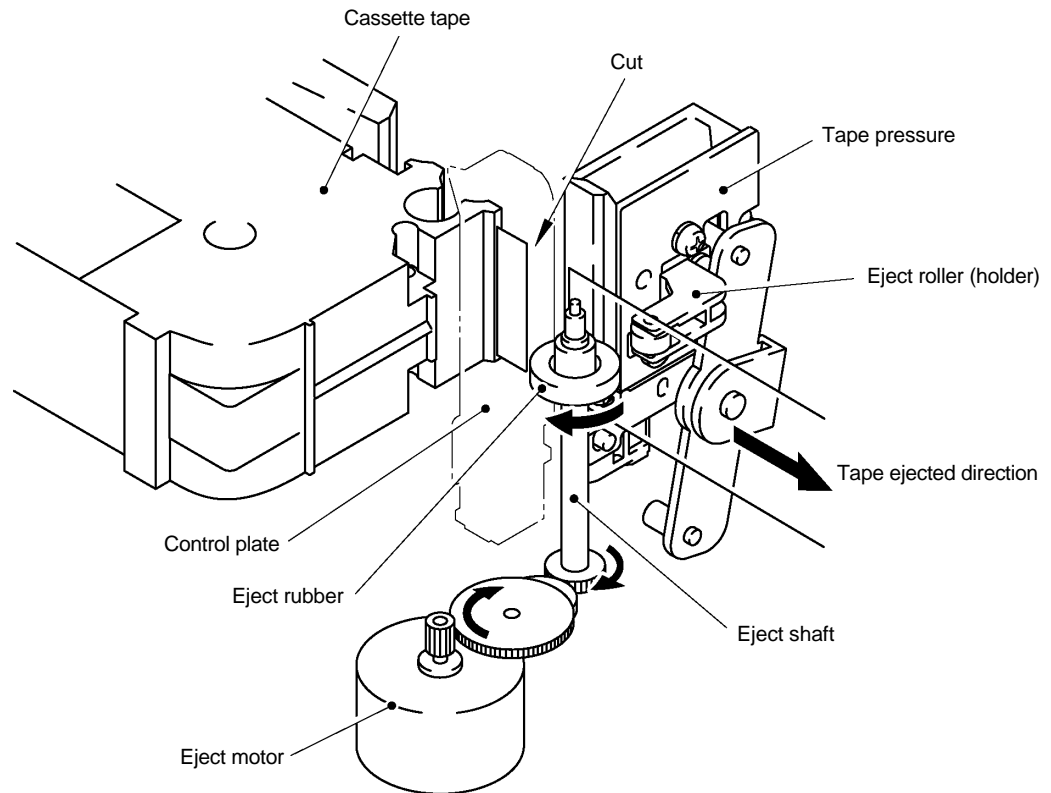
Tape Eject Mechanism (Full Cut Only)
